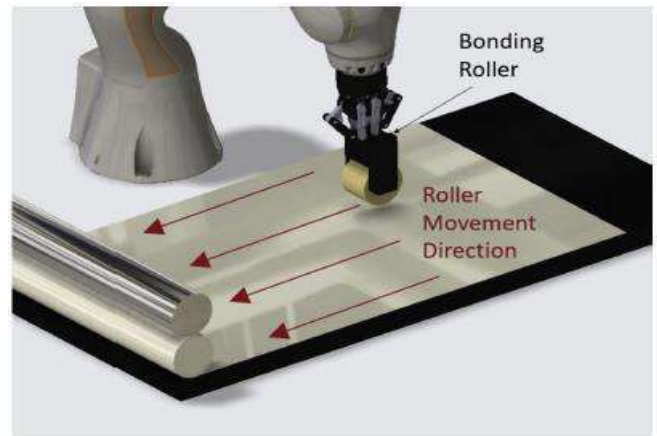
Illustration showing bonding of layers using a silicone roller tool.
